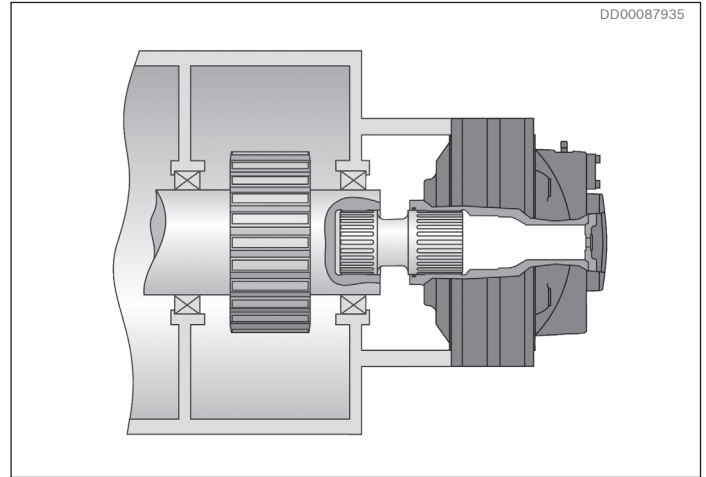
Example: Flange mounted motor with spline to avoid high radial load from driven shaft.
